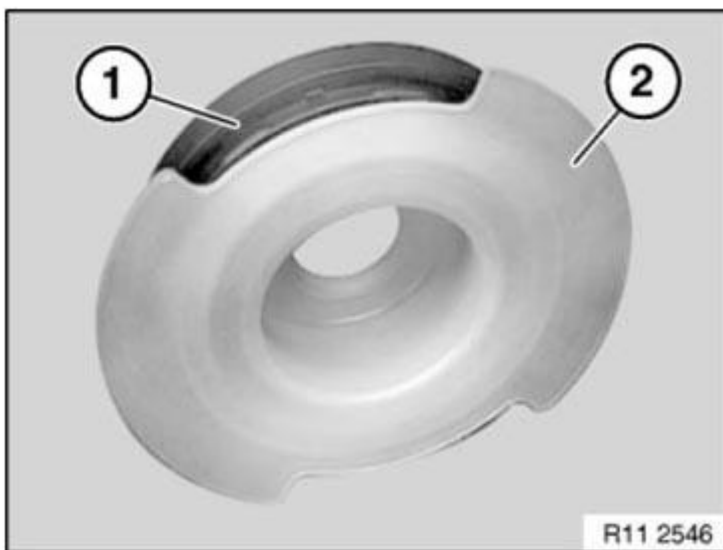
Identifying Radial Shaft Seal And Support Sleeve
